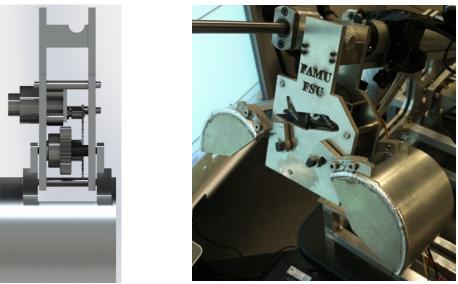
(Left) CAD model of finalized gripper depicting chain drive and gear train, (Right) Photo of the gripper in the open position
